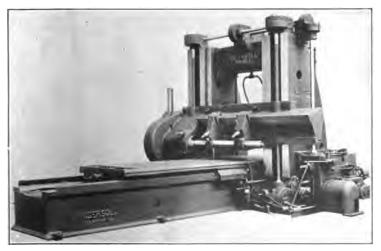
Planer type milling machine with horizontal spindle. (Courtesy Ingersoll Milling Machine Co.)
